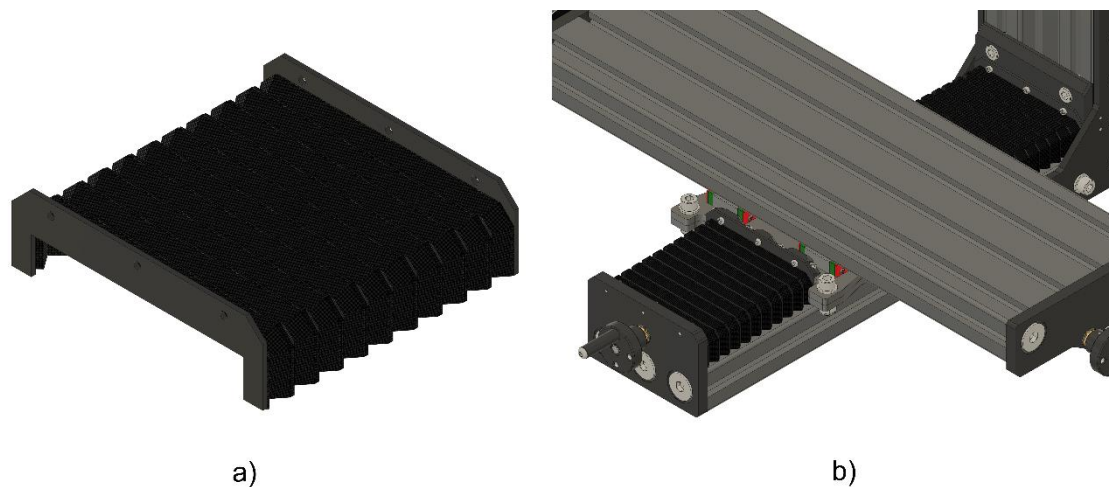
a) Bellow component. b) front and rear bellow installed to the Y-axis, covering the linear motion components from chips and other debris.
